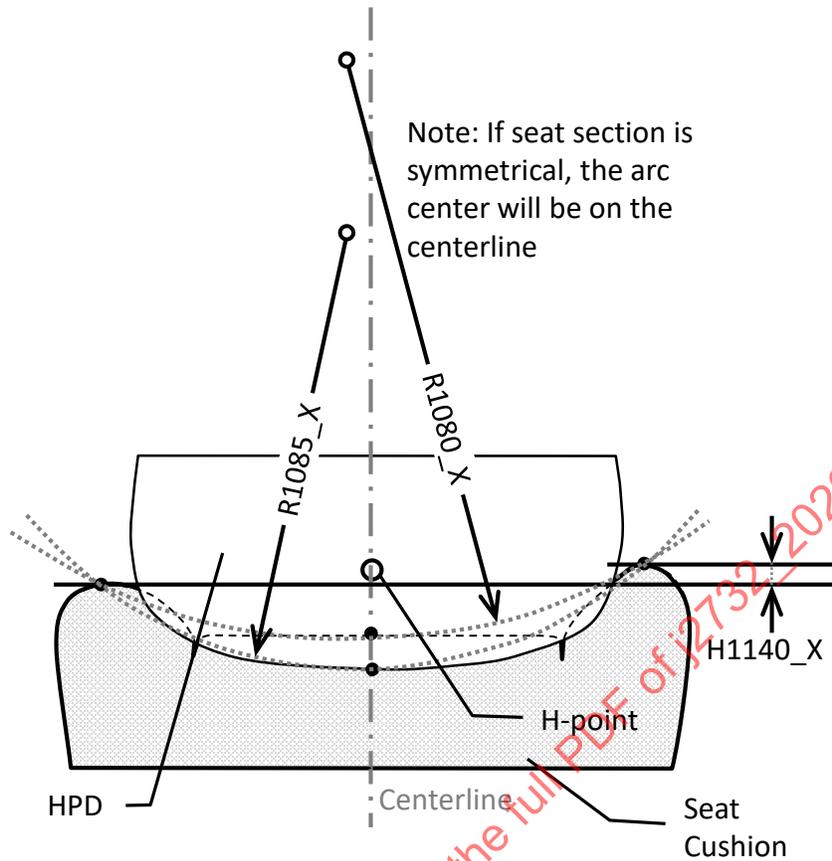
D - Seat cushion lateral cross-section - bolster asymmetry and radial dimensions
